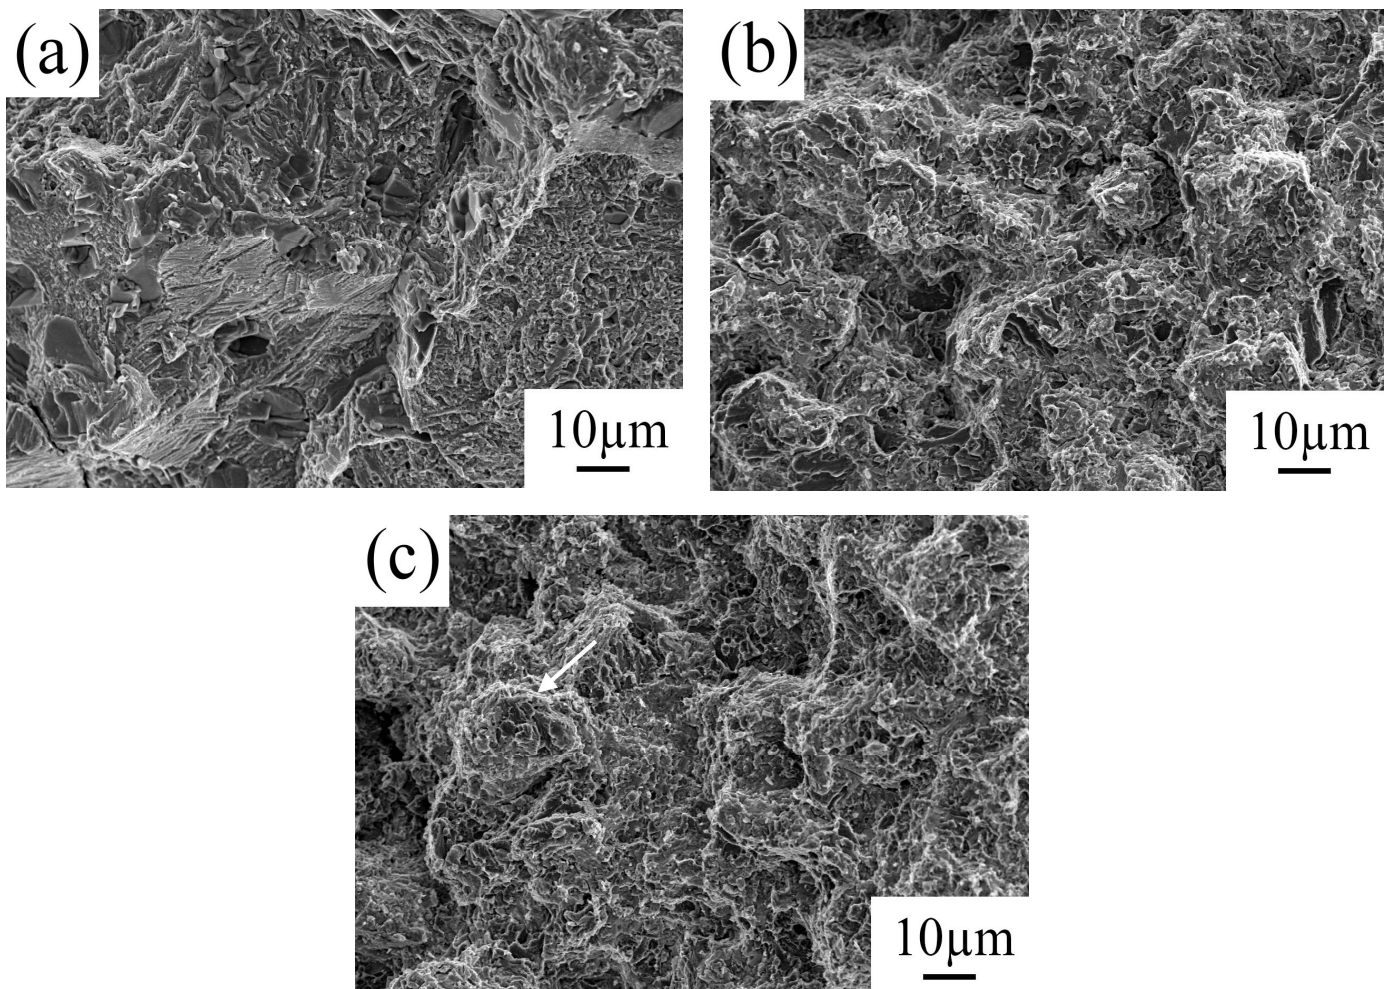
The fracture surfaces of (a) Vanadis 4 Extra sintered at 1260°C, (b) V4ES/10TAC sintered at 1320°C, (c) SZ-V4ES/10TAC specimen
